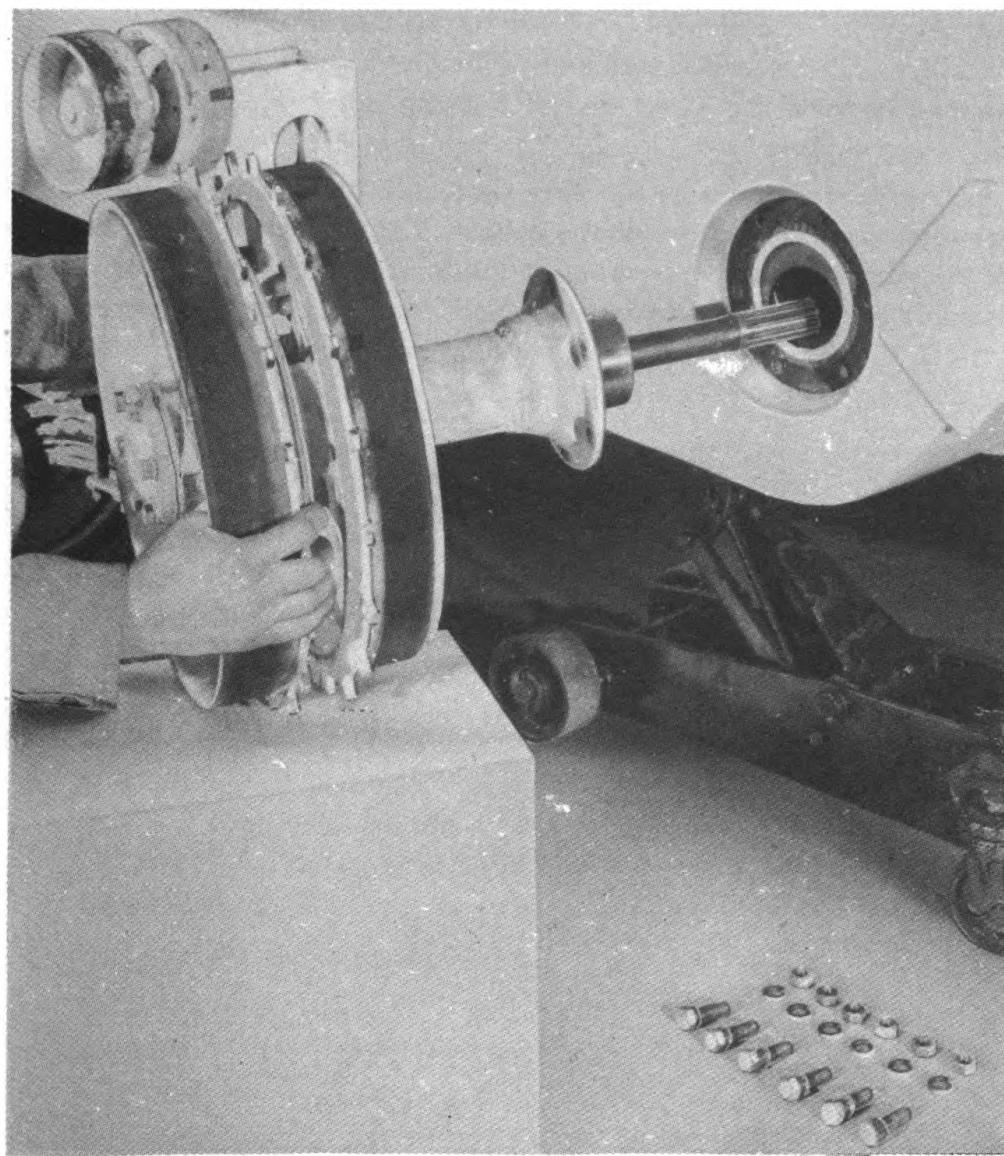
Drive Wheel, Shaft, and Carrier Parts
